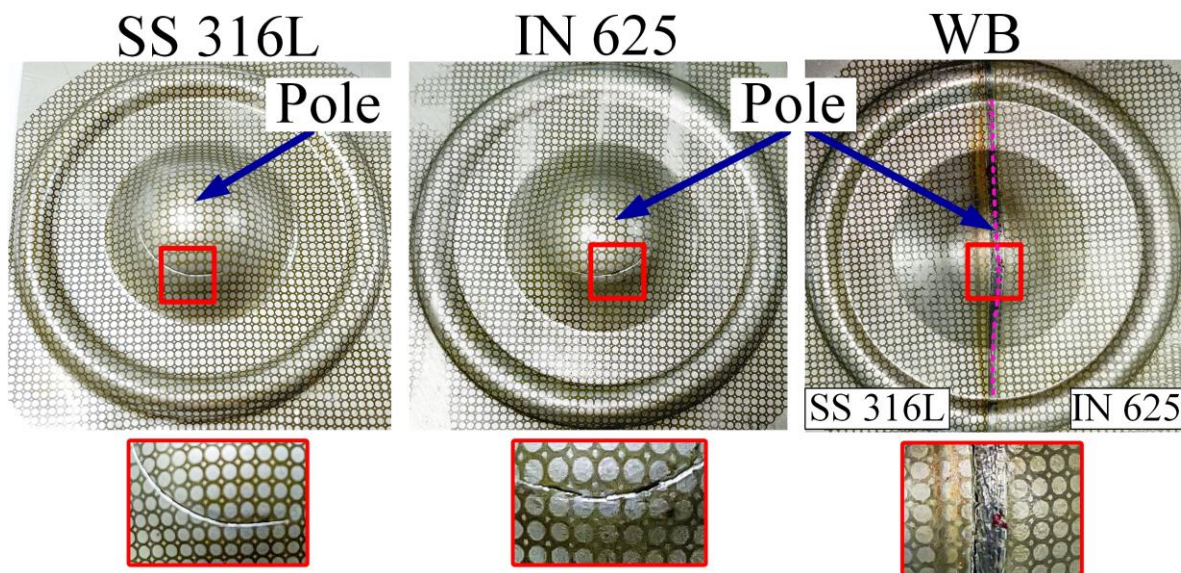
Stretched tension-tension specimens for the BMs and welded blank with magnified view of their fracture location
